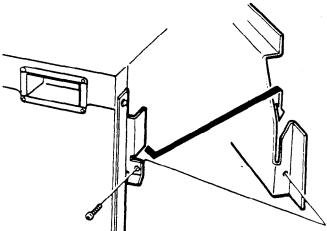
Securing the Level II Advanced Expansion KSU to the Wall Mount Bracket
